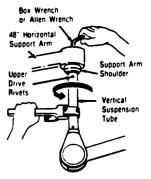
UPPER DRIVE RIVET INSPECTION.
